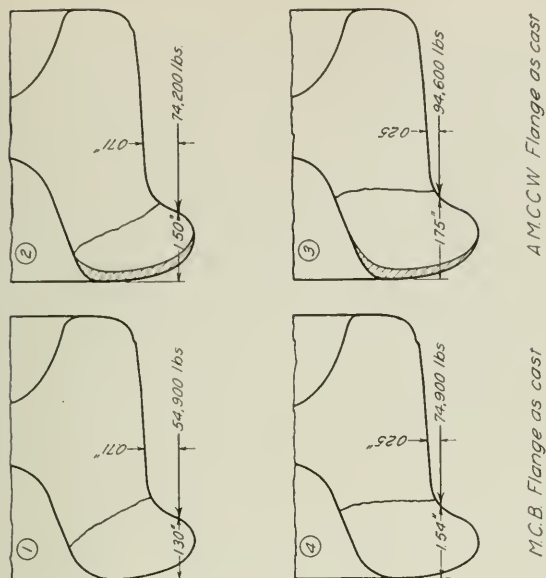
725-LB. M. C. B. WHEEL No. 132 649.
